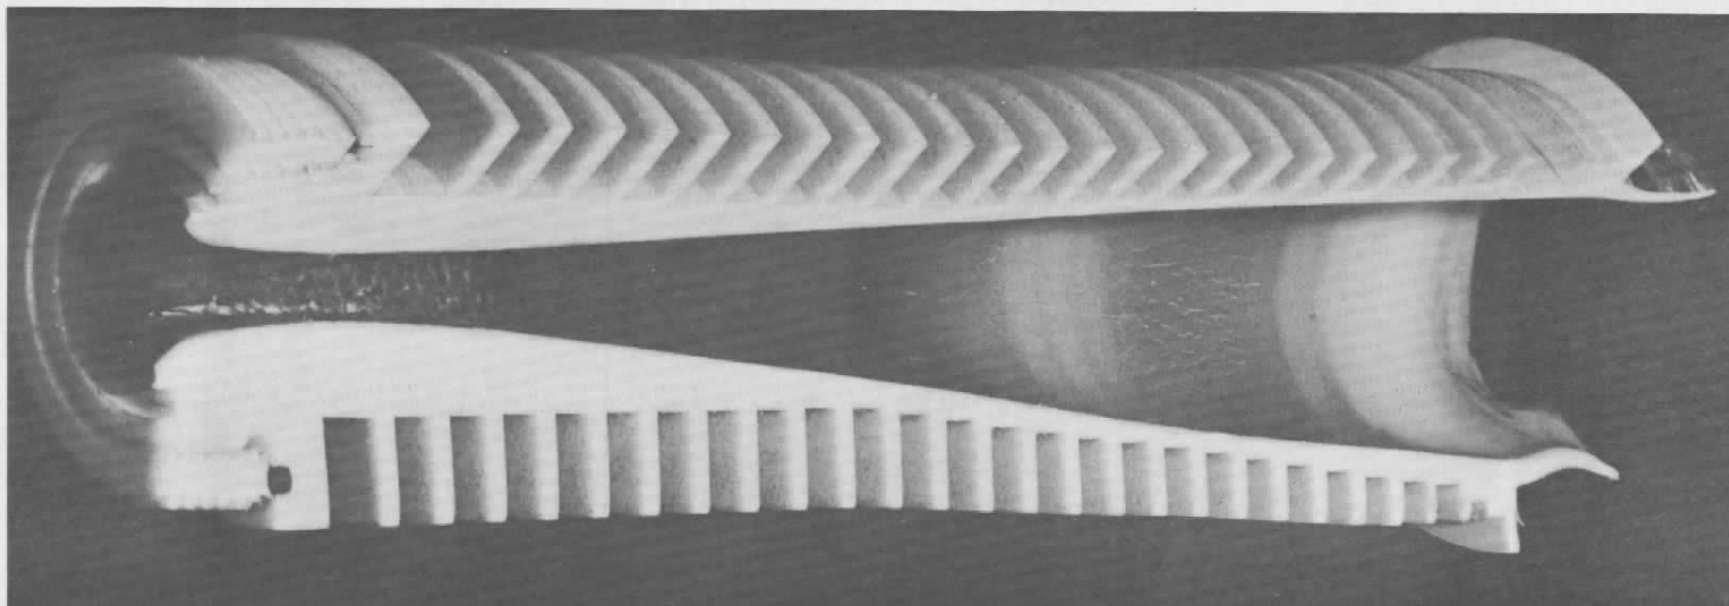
View Of Teflon Axisymmetric Nozzle After Testing
